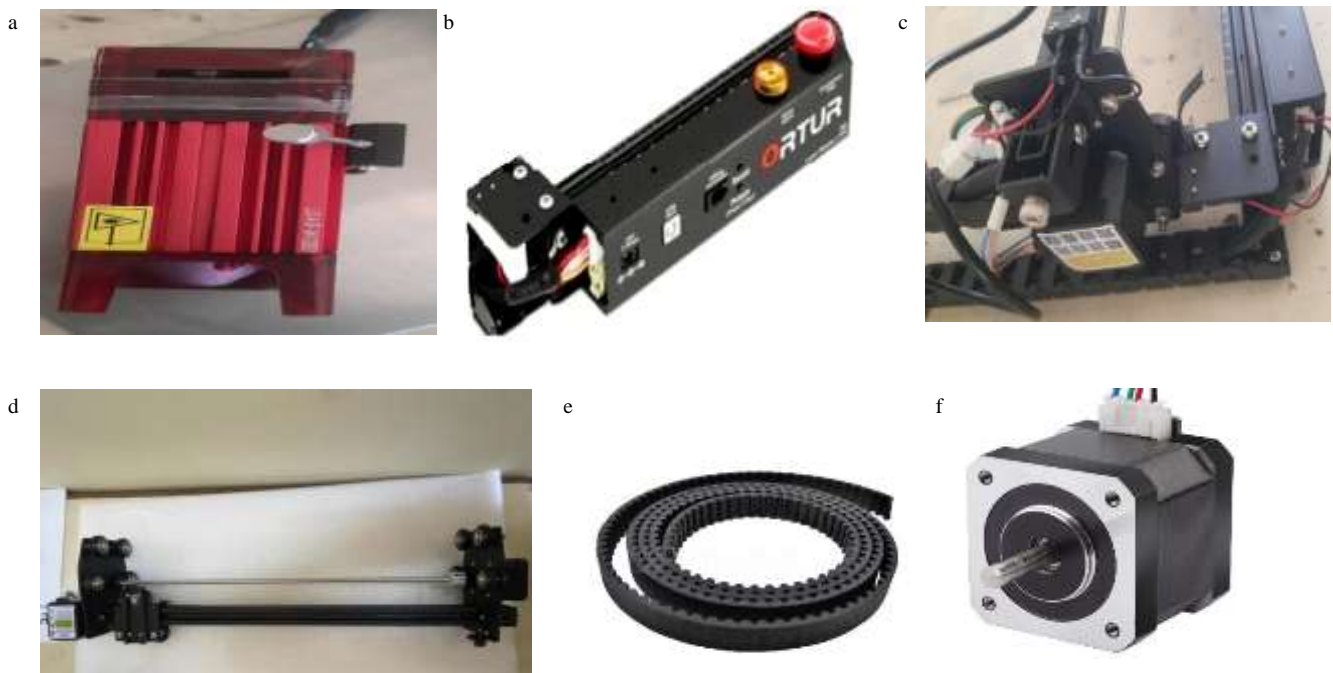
(a) Laser Module, (b) Mainboard, (c) 24v 2amps Controller Wiring Connection, (d) XAxis Assembly, (e) Timing Belt, (f) Steeper Motor
